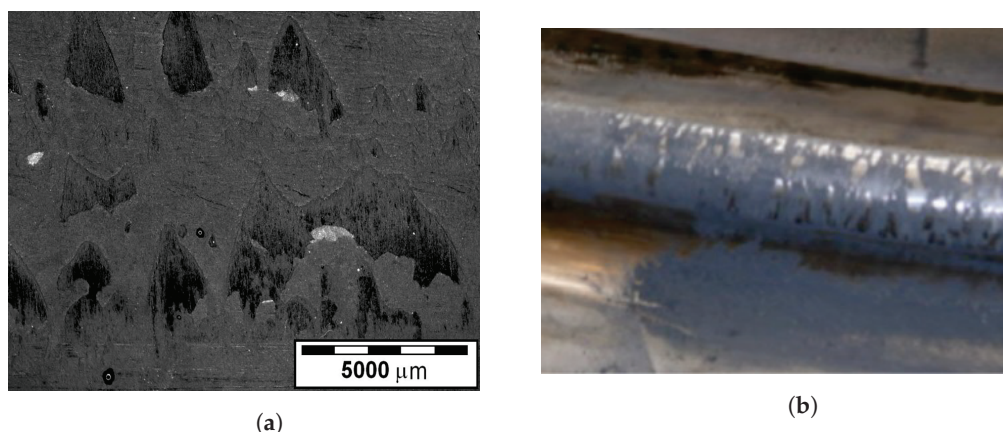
Gross material transfer on industrial tools. (a) Stereomicroscopy image obtained from a surface replica of a tool radius; (b) Picture obtained from a radius of a production tool.
